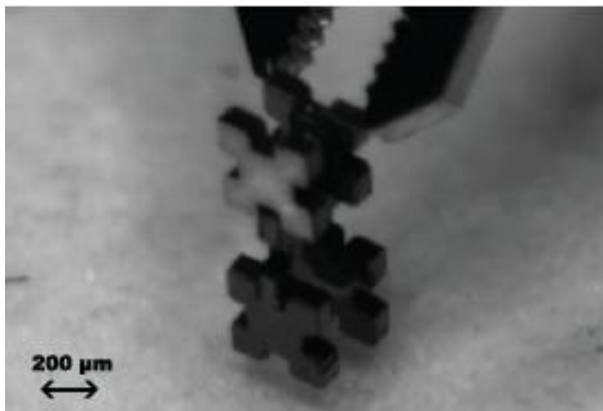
Zooming picture of the complex 3-D structure assembled.
